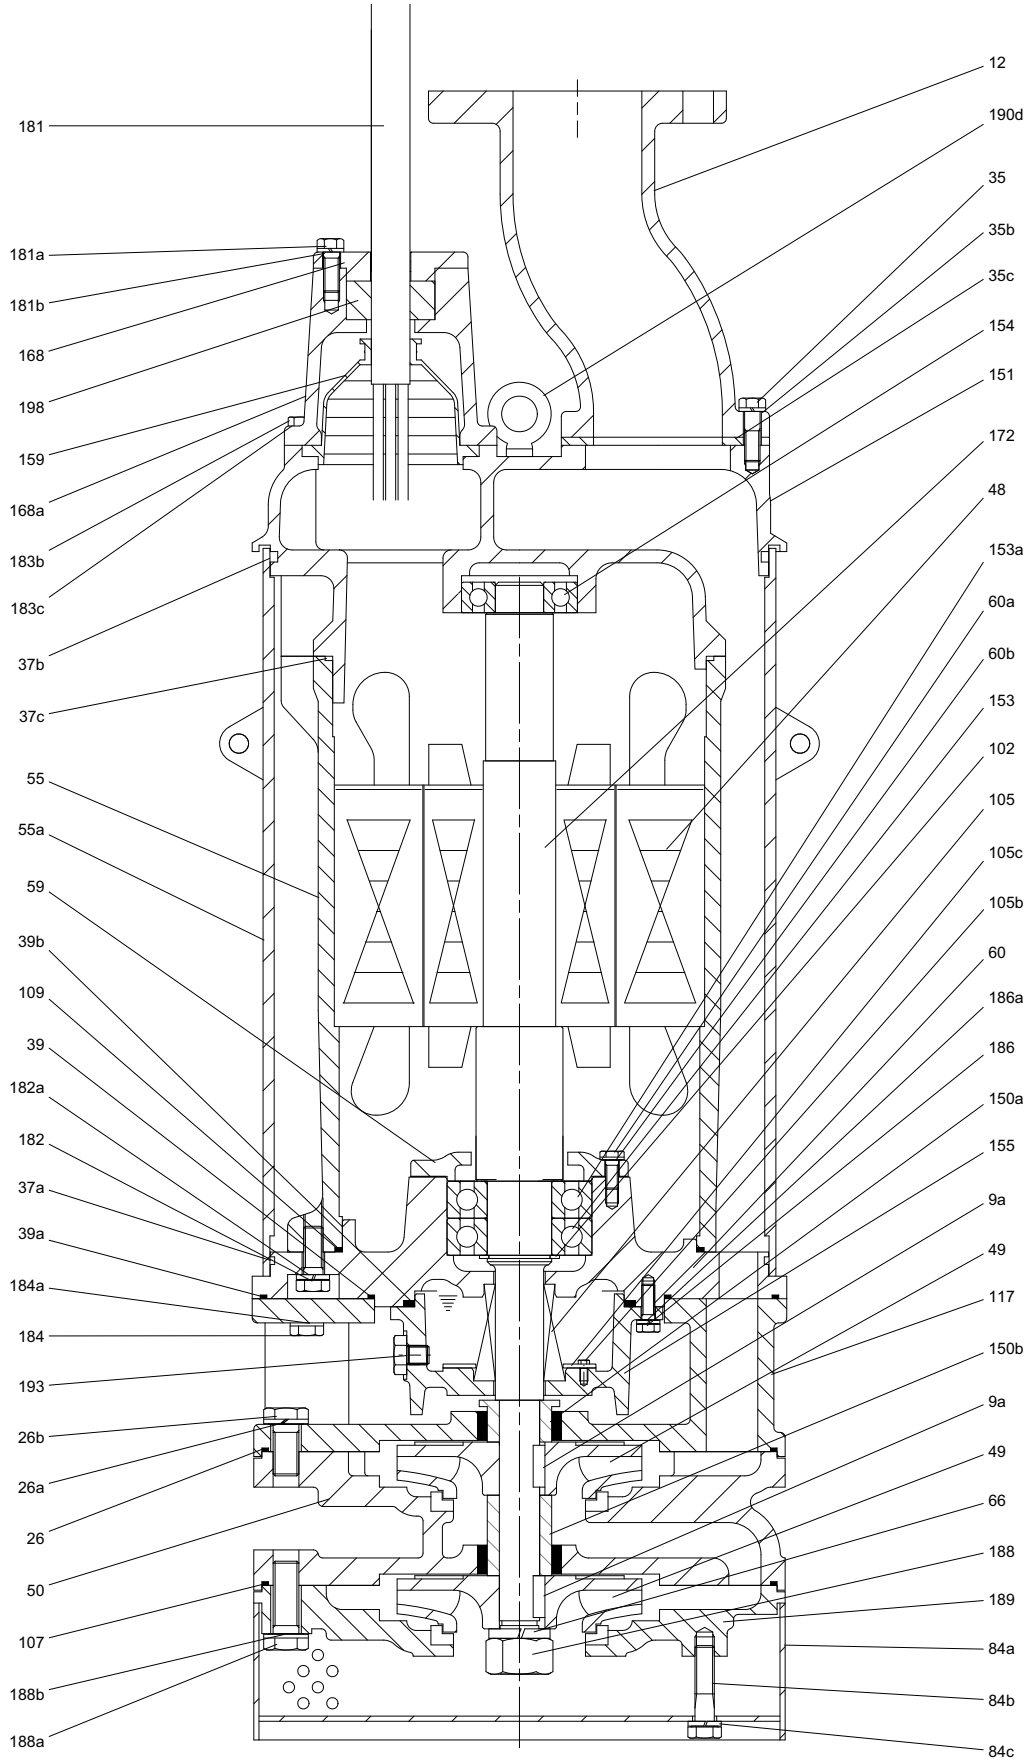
Exploded drawing DWK.H.7.100.110 and DWK.H.7.100.220
